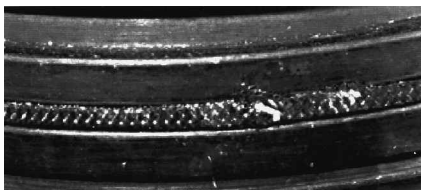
1/16-in. hybrid seal after scrubbing, 250 psi preload.
